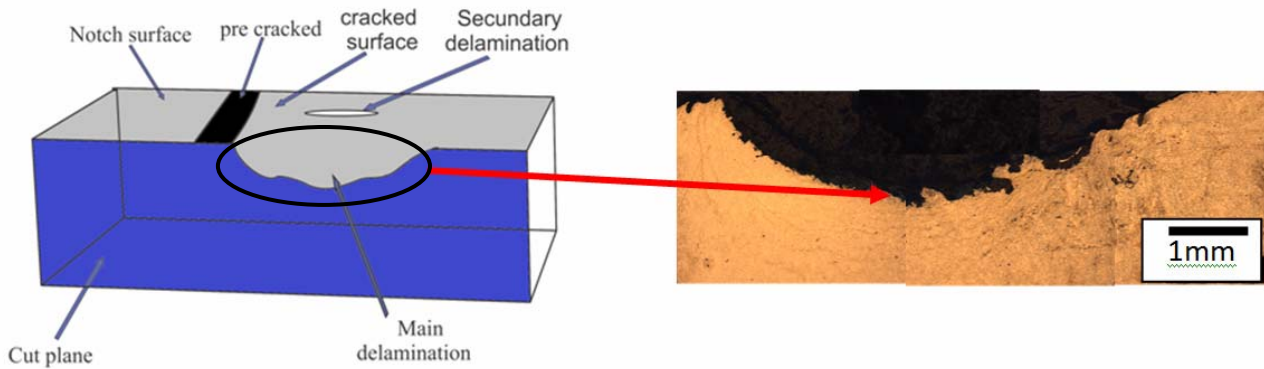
a) Schematic drawing shows the specimen section where was made cut perpendicular to the fracture surface b) fractured surface from the delamination region.
